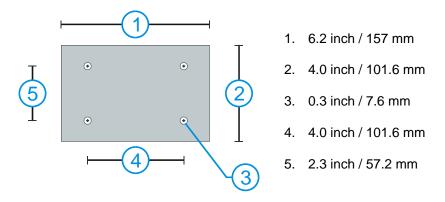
VMT Remote Keyboard - Mounting Dimensions
